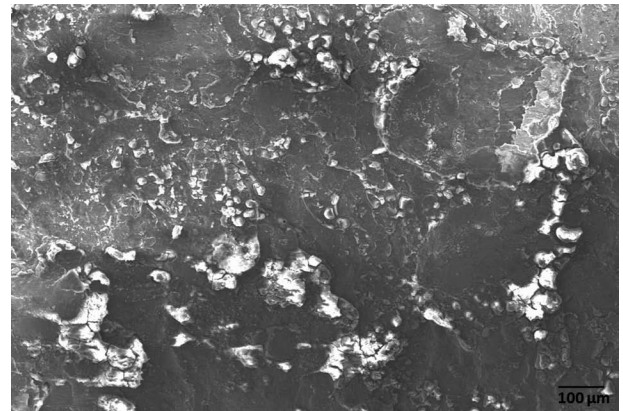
High magnified image of fracture surface shown in Fig. 229 indicating corrosion products on the fracture surface
